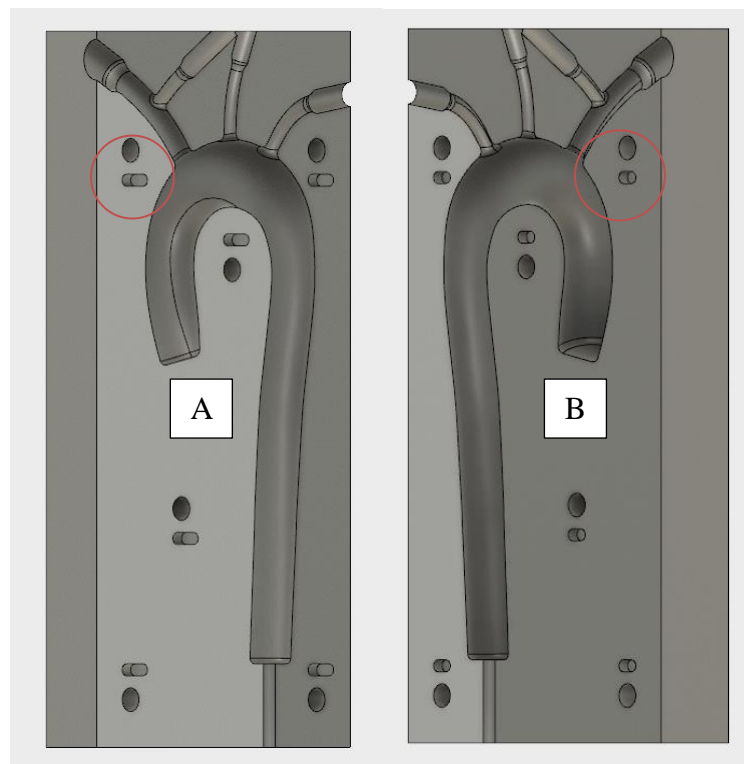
(A): Wax mould plate A with male interlocks. (B): Wax mould plate B with female interlocks (circled).
